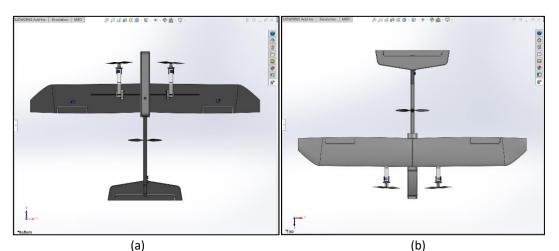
The assembly design of hybrid UAV (a) bottom view (b) Top view
